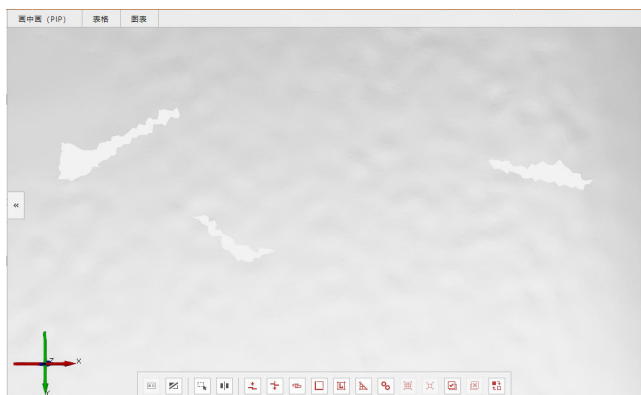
Scan data of sheet metal parts with defective sprayed developer2.
